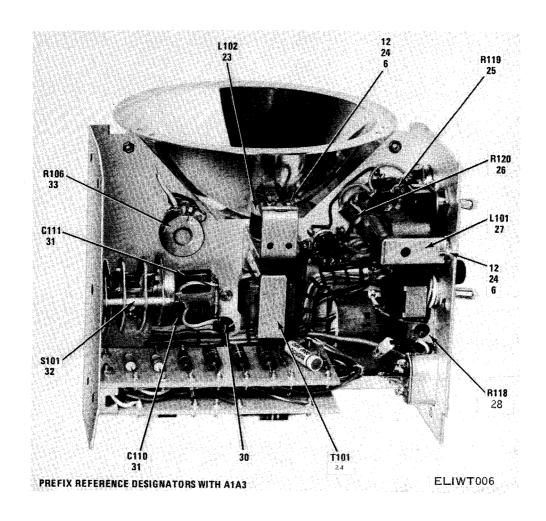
$\bigcirc$ . Chassis assembly (Sheet 2 of 2).
